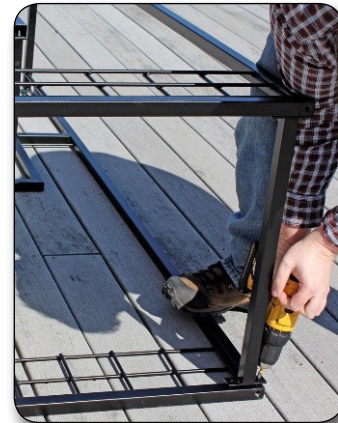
Figure B. Match the cross beam screw holes with the pre-drilled holes on the tiered side panel.
